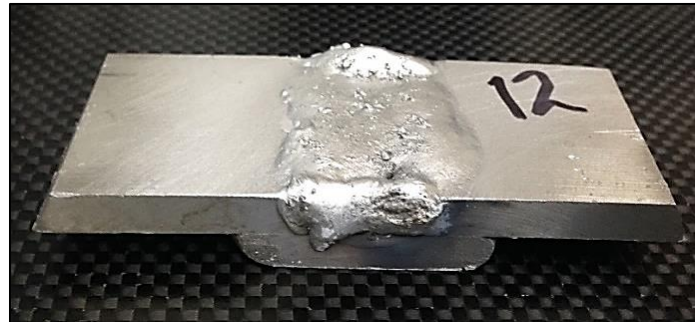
Test specimen welded with filler reinforced with NbB₂ nanoparticles.
